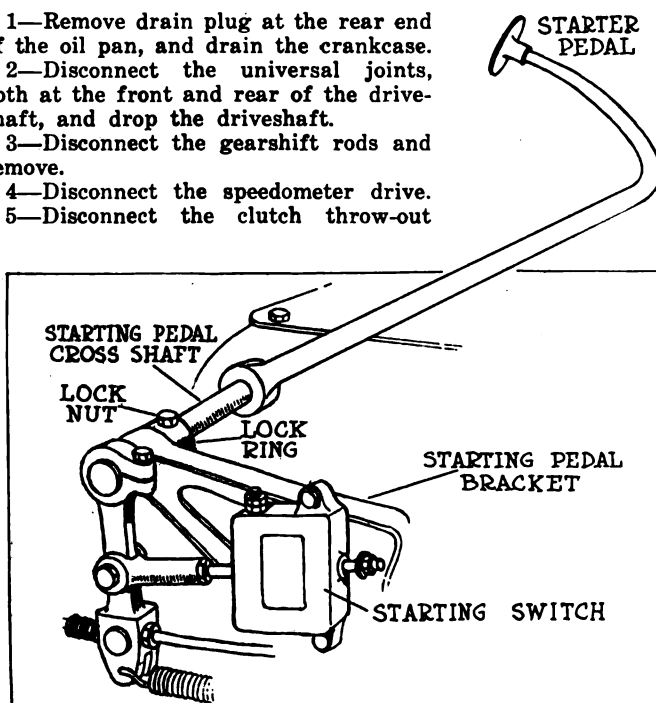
Starting motor switch details, showing mechanism which must be removed
